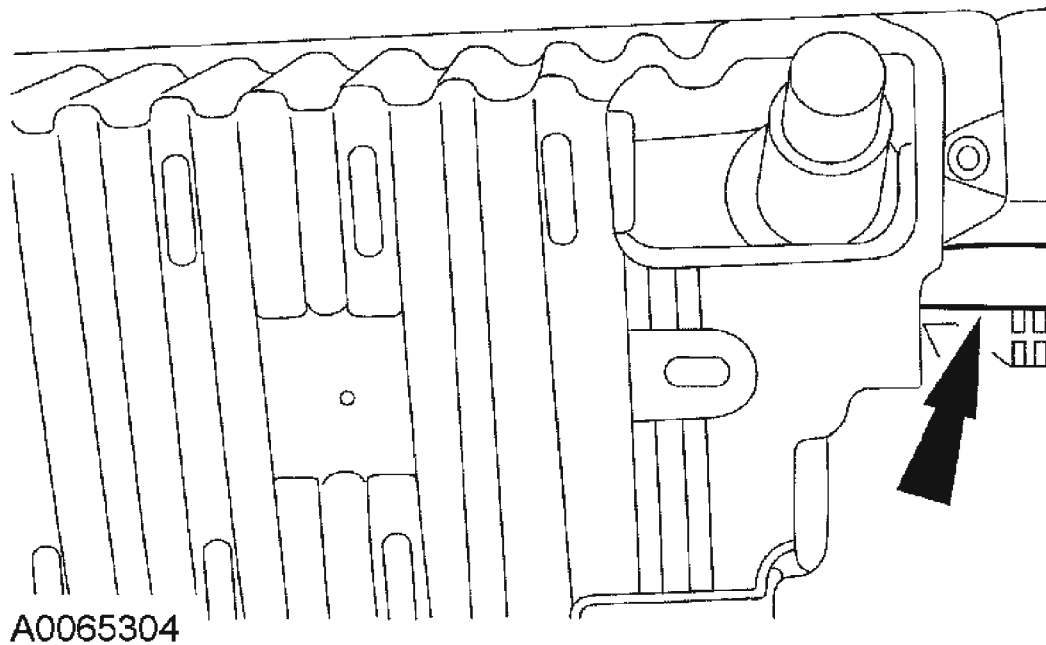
Disconnecting Canister Vent Solenoid Tube
